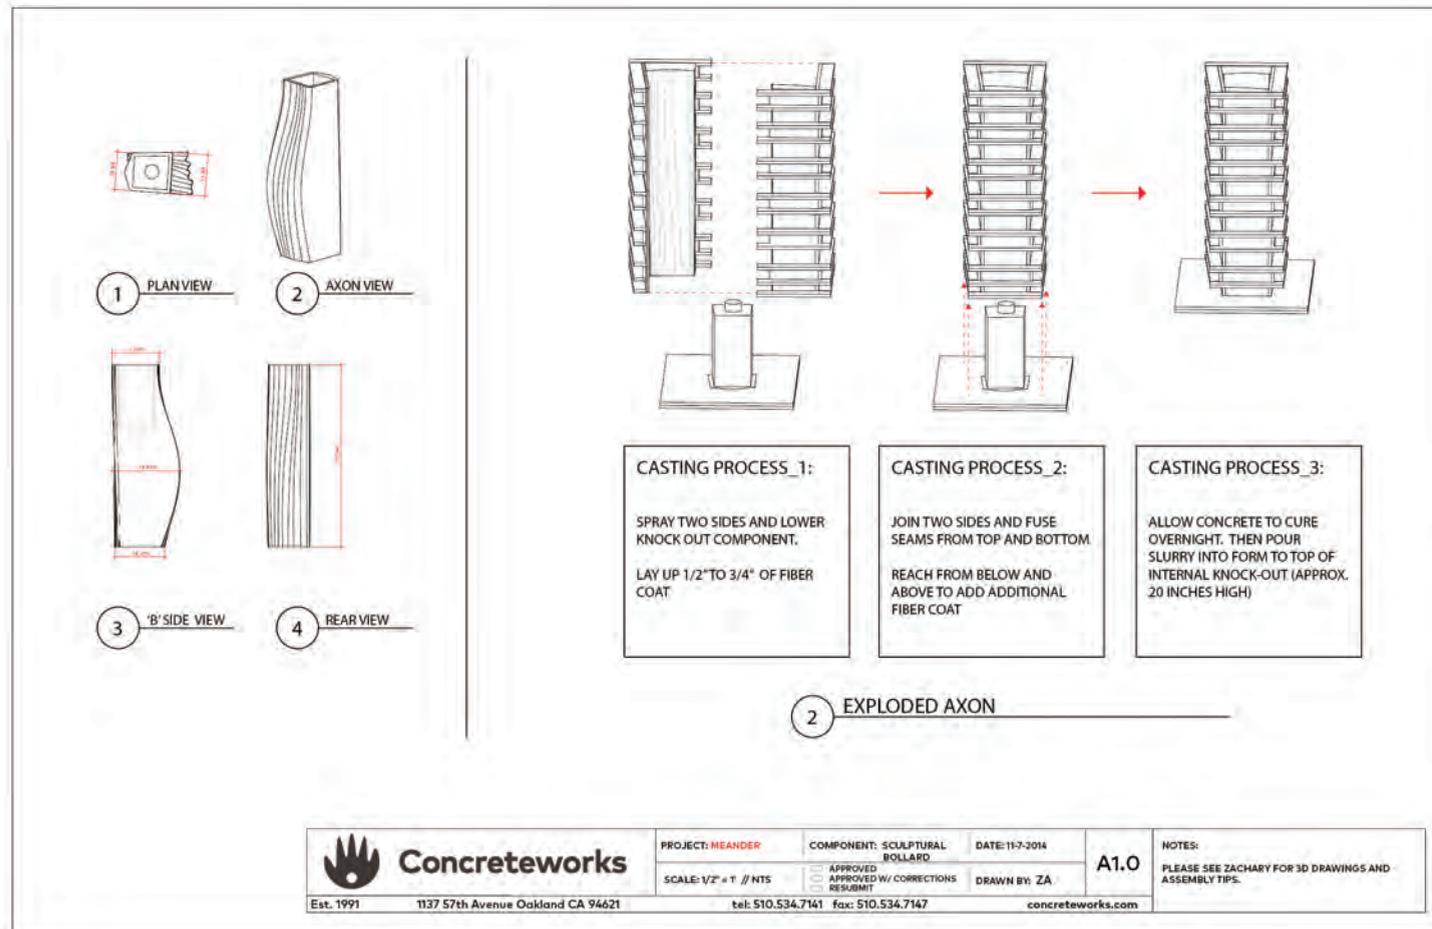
Shop drawings of typical mold for cast concrete pillar.
